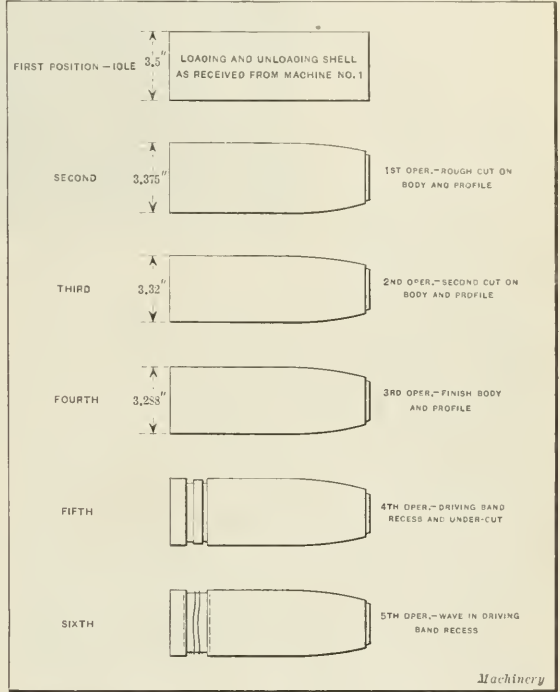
Diagram illustrating Sequence of Operations performed on Machine shown in Fig. 7
